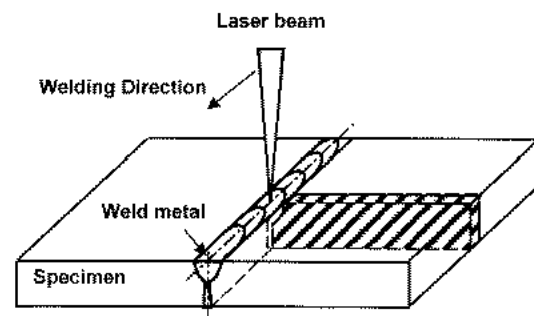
Schematic illustration of bead-on-plate laser welding
